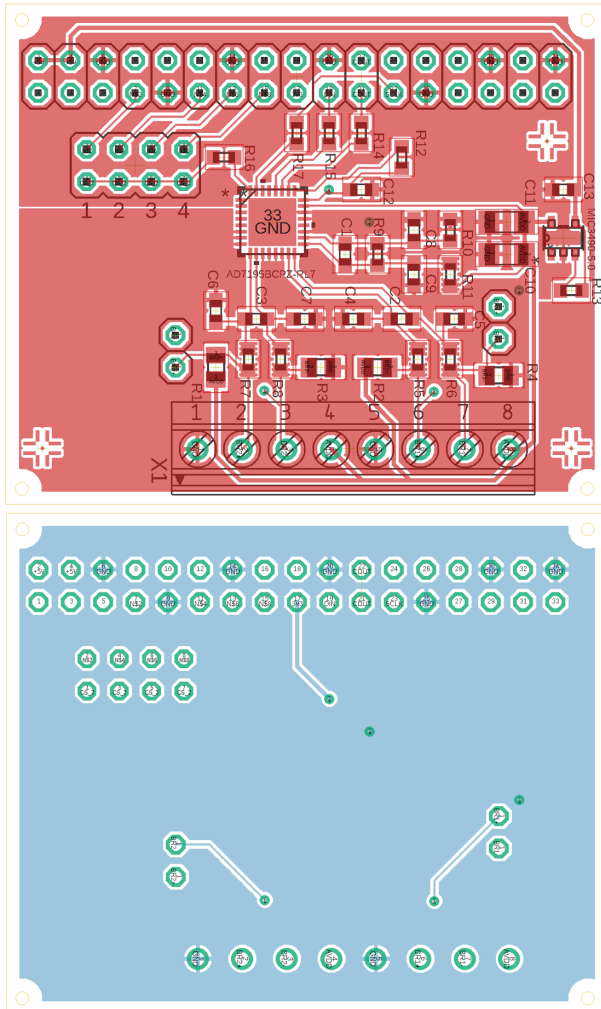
PCB Layout of the AD Converter Circuit integrating the AD7195.
